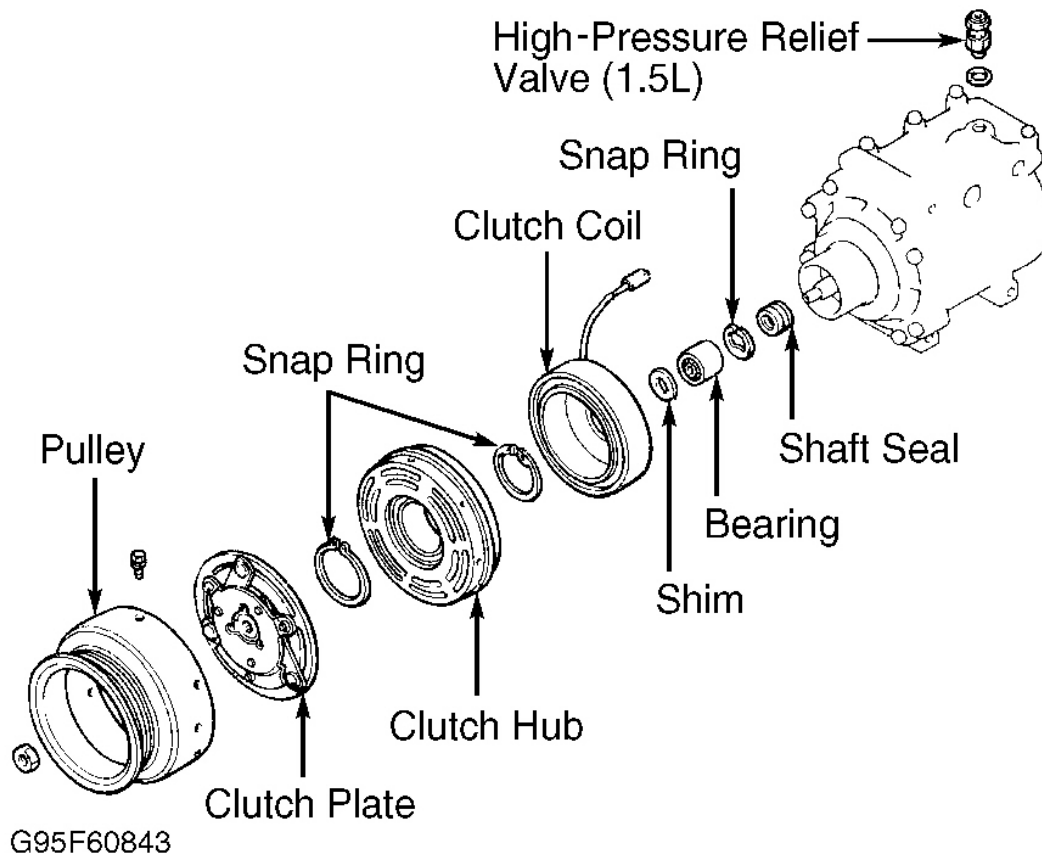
Exploded View Of Compressor (Sanden Scroll)
